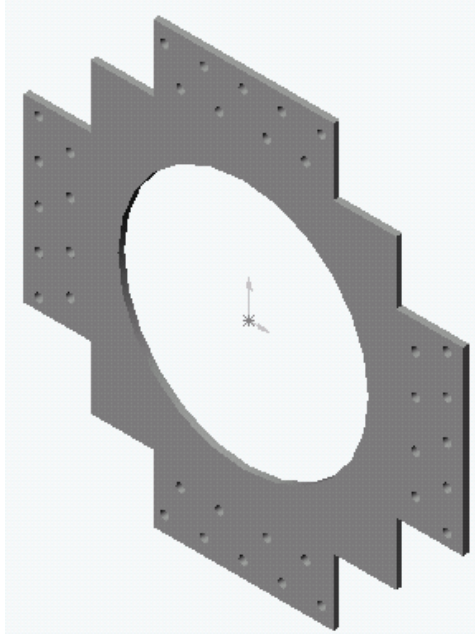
A Solidworks Drawing to Help in Designing the Spray Chamber (Picture Courtesy of Mr. Travis Michalak of the AFRL)
